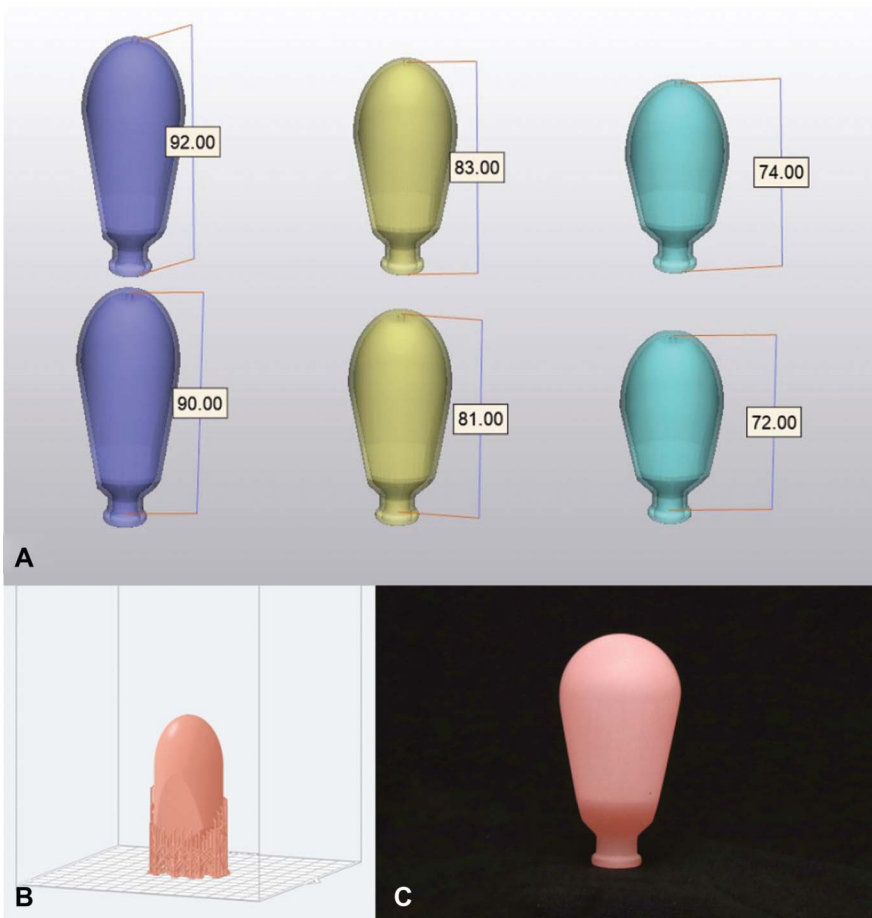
Three-dimensional printing steps: design, printing, post-processing. A. Various-sized (in mm) vaginal molds with a spherical superior aspect (*upper row*) or superior plateau (*lower row*). B. Mold design using PreForm build preparation software. C. Mold after postprocessing. Note the smoothed edges and polished surface. Images created by Joel Pino. Used with permission.
